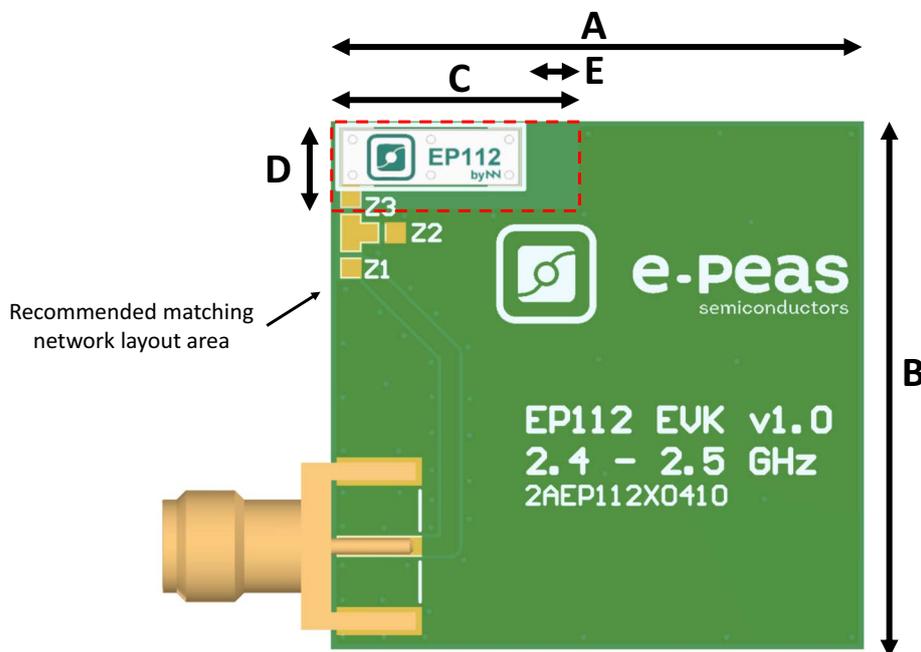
EP112 2.4-2.5 GHz EVK dimensions (drawing)
